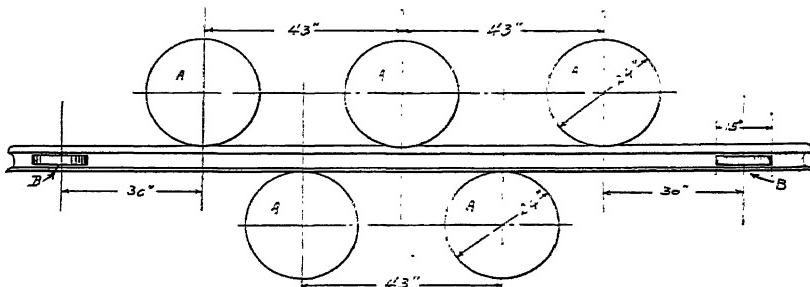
ARRANGEMENT OF ROLLS IN ROLLER STRAIGHTENING MACHINE FOR HEAVY STEEL RAILS AT KRUPP WORKS.
